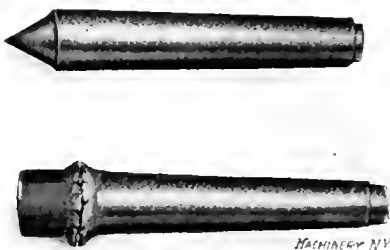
Lathe Center made with High-speed Steel Point electrically welded
